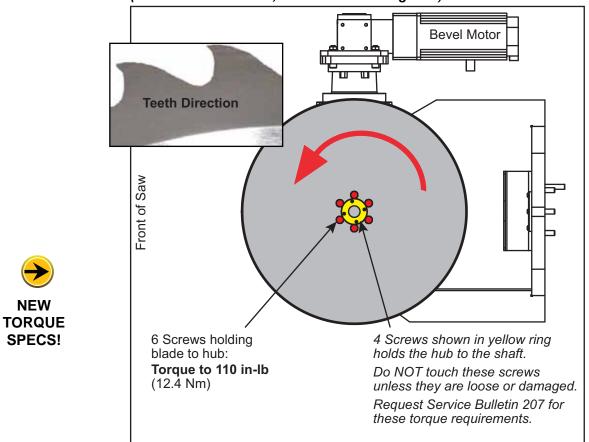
Torque Specs for Saw Blade (View from side of saw, with blade at 90 degrees.)
